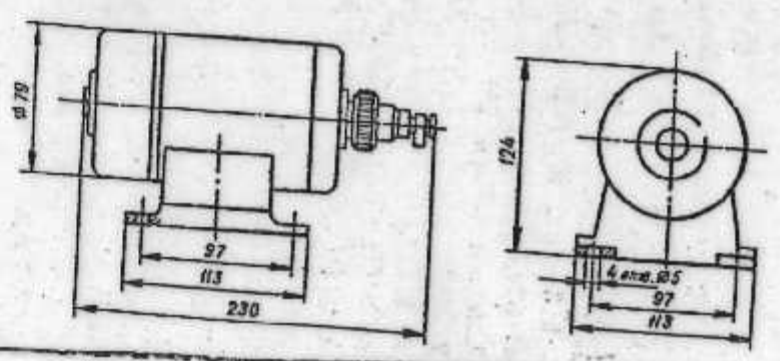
Overall and mounting dimensions of Gyro ГПК-59.
